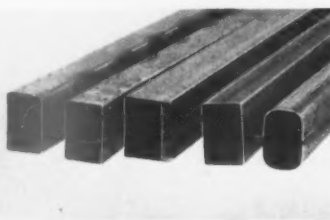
A selection of chassis side frame welded sections prepared for fatigue tests
